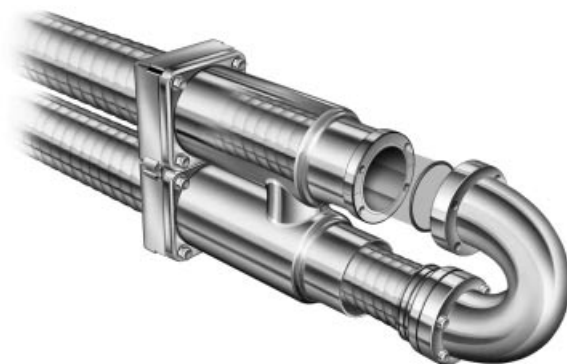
Mono-tube heat exchanger. (Courtesy of Tetra Pak Processing Components AB.)
